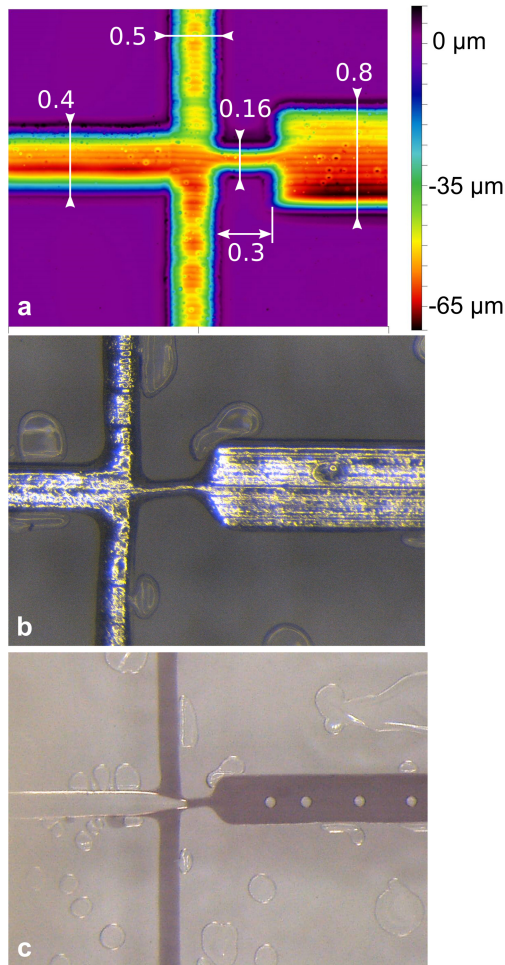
Fabricated flow focusing device. (a) Profile scan and dimensions in mm. (b) Channels filled with solid gallium. (c) Device testing.
